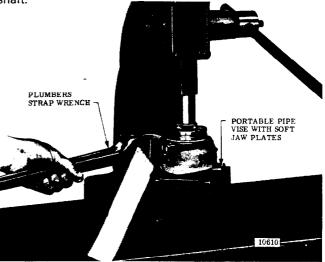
Winding Load Brake Gear using Strap Wrench to set up Brake Spring.
